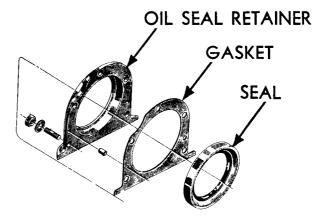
Exploded View of Oil Seal Retainer and Seal
